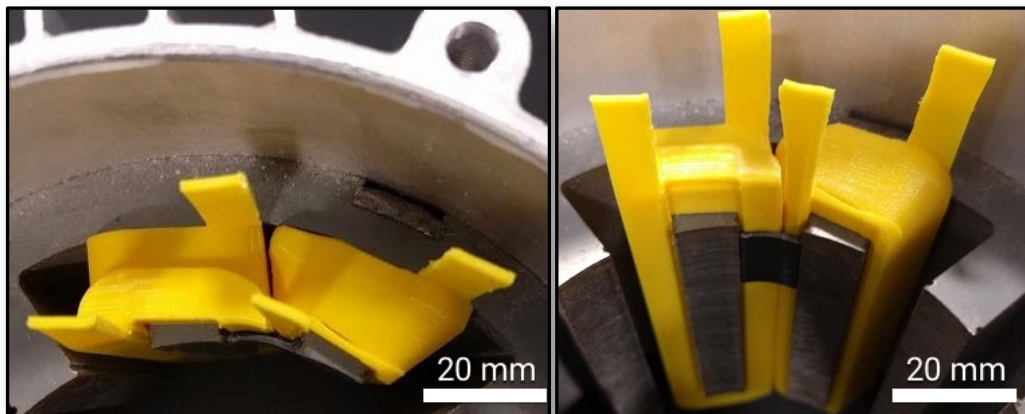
Plastic printed windings to prove fit and assembly into an SRM.
